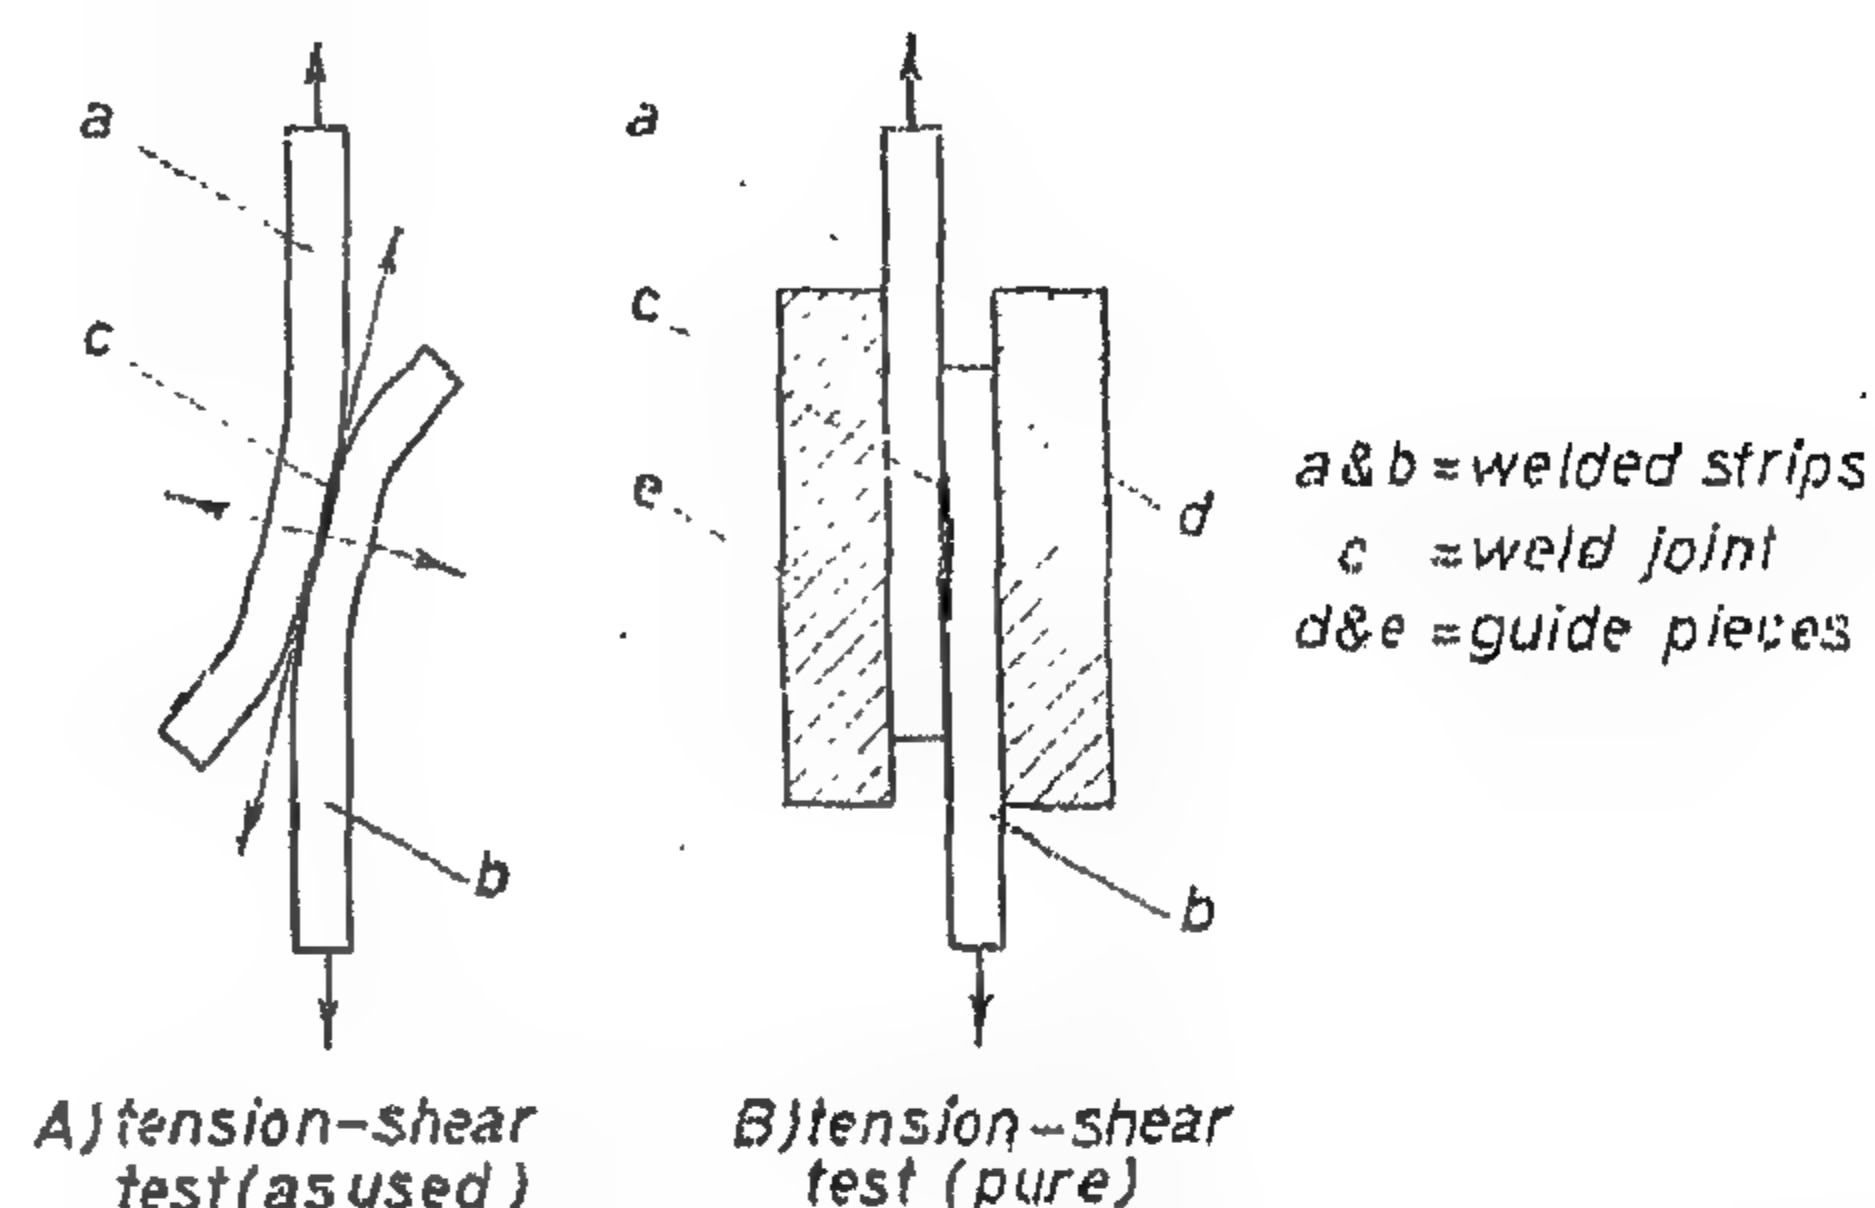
A and 5 B): Position of the welded specimen in the tension-shear test.
